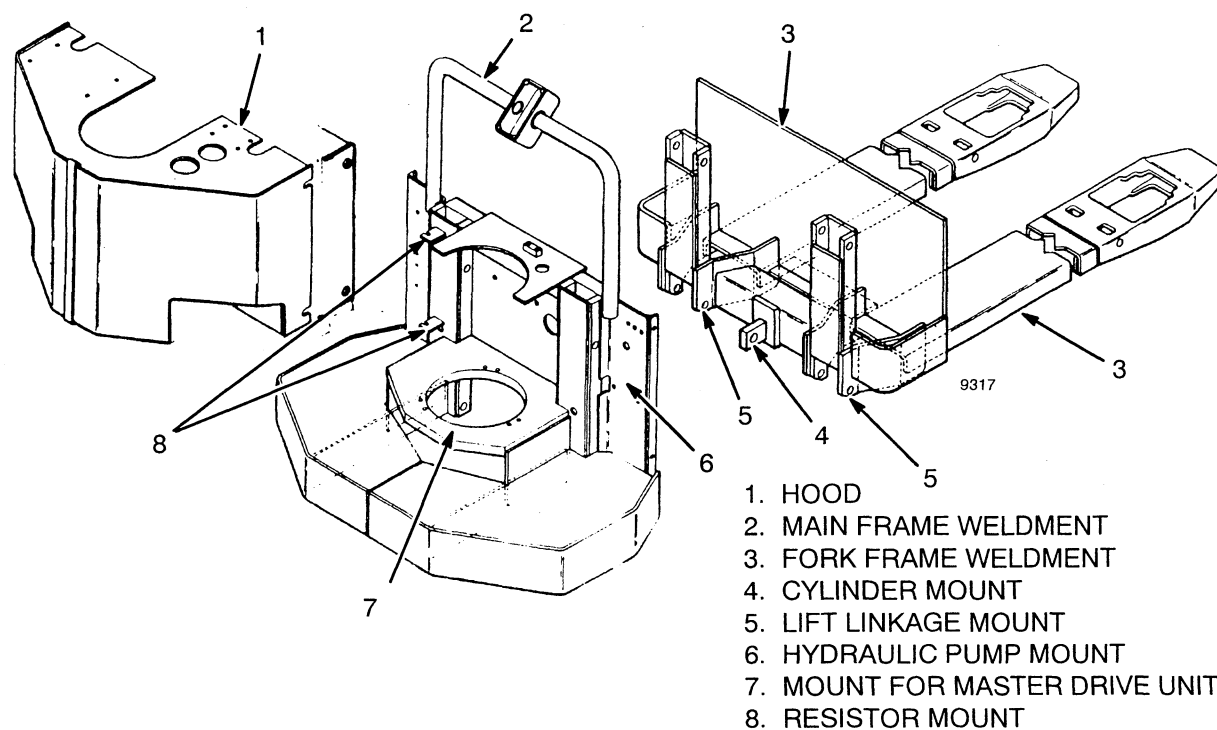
FRAME WELDMENT - W40XT, W45XT
